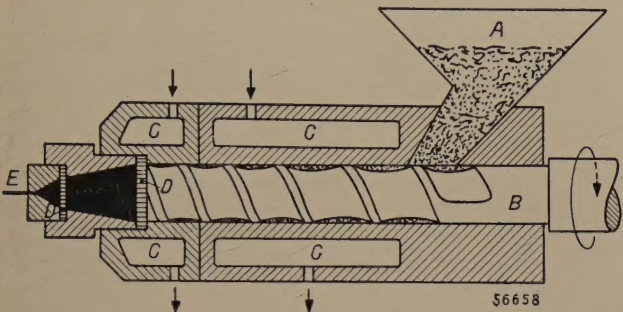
The extrusion of thermoplastic material. *A* hopper charged with the moulding mass, *B* worm spindle, *C* heating elements, *D* sieves, *E* extruded product.
